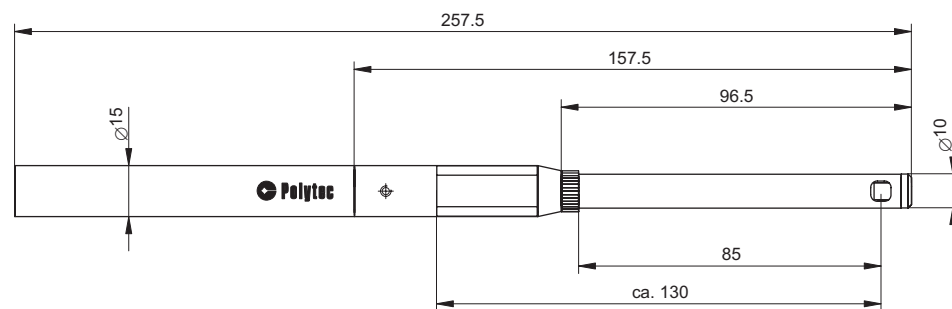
View of the side exit head OFV-C-110 (dimensions not specified are given in mm)
